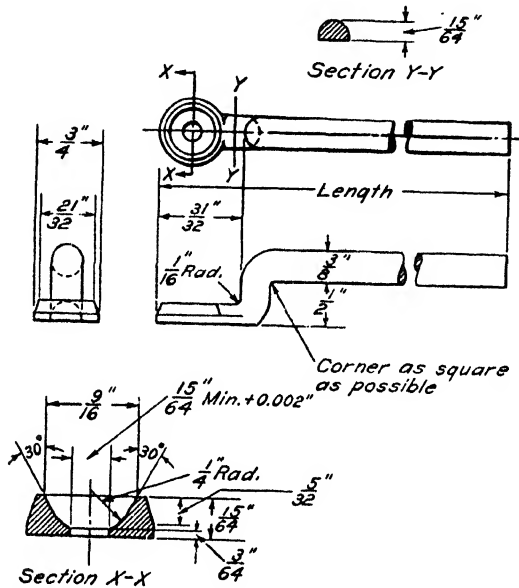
This unusual part is produced in a hot header, the double bend being made after the head with recess is completely formed.
